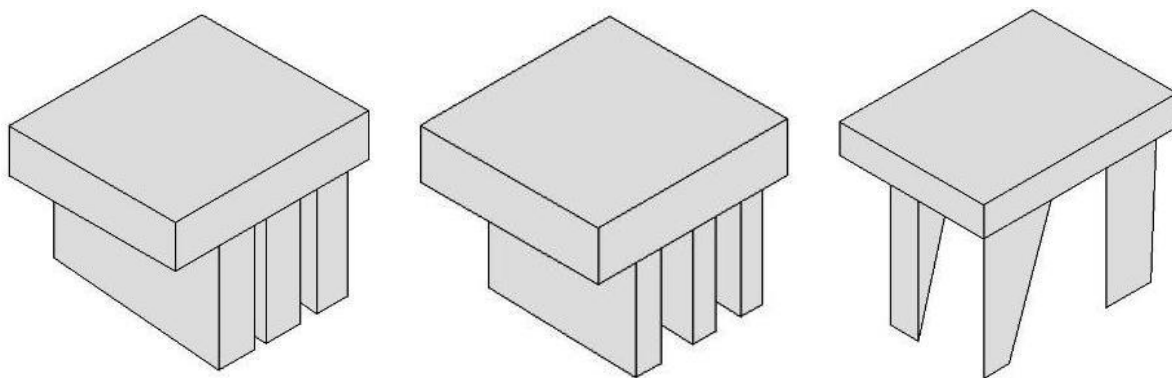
Typical sandwich composite plate with multiple stiffeners in longitudinal, transverse, and inclined directions [75]
